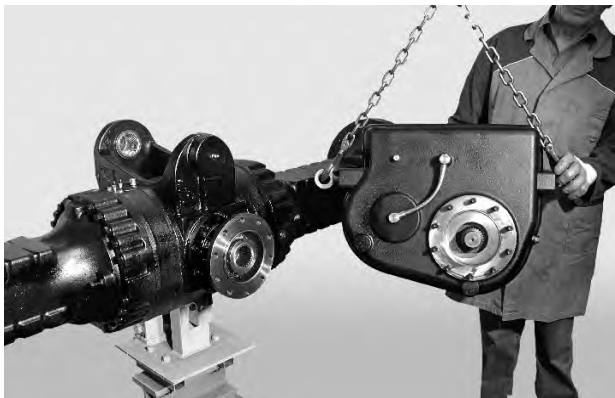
Disjoin the entire reduction unit from the axle and place it on a bench.
